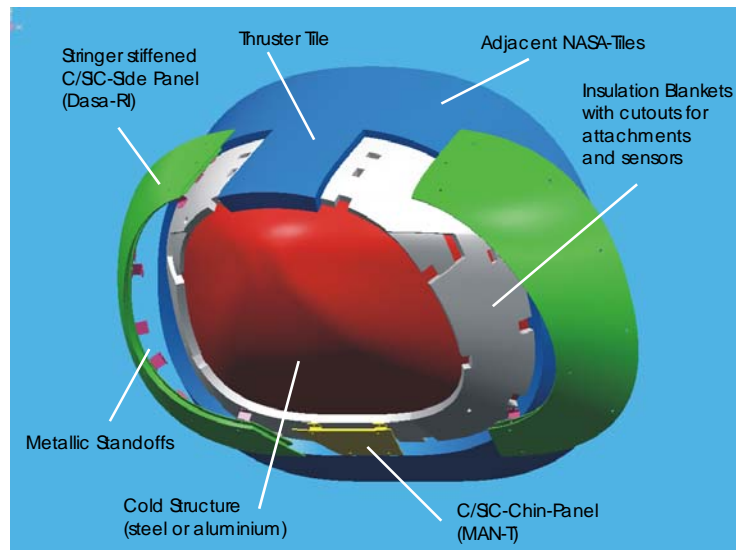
Nose Skirt Assembly with Insulation Blankets
